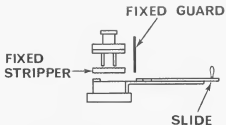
A slide feed enabling components to be fed to the working area beneath a fixed guard. Design of the slide must be such that it is impossible for the punches to strike the slide.
